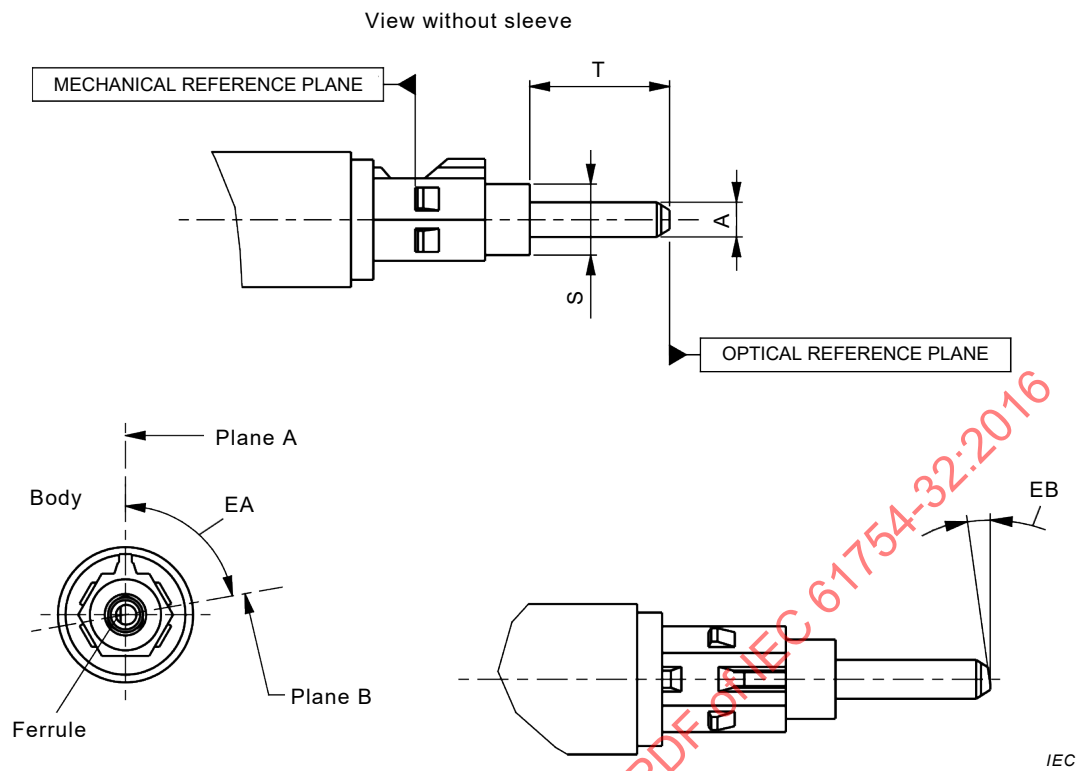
Fixed ferrule interface (plug connector) view without sleeve
